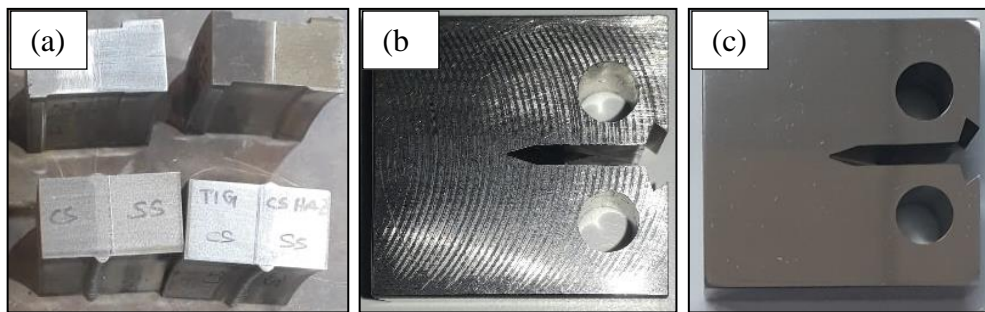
Photograph shows (a) extracted material for preparing CT specimen, (b) machined CT specimen and (c) polished CT specimen prepared for test.
